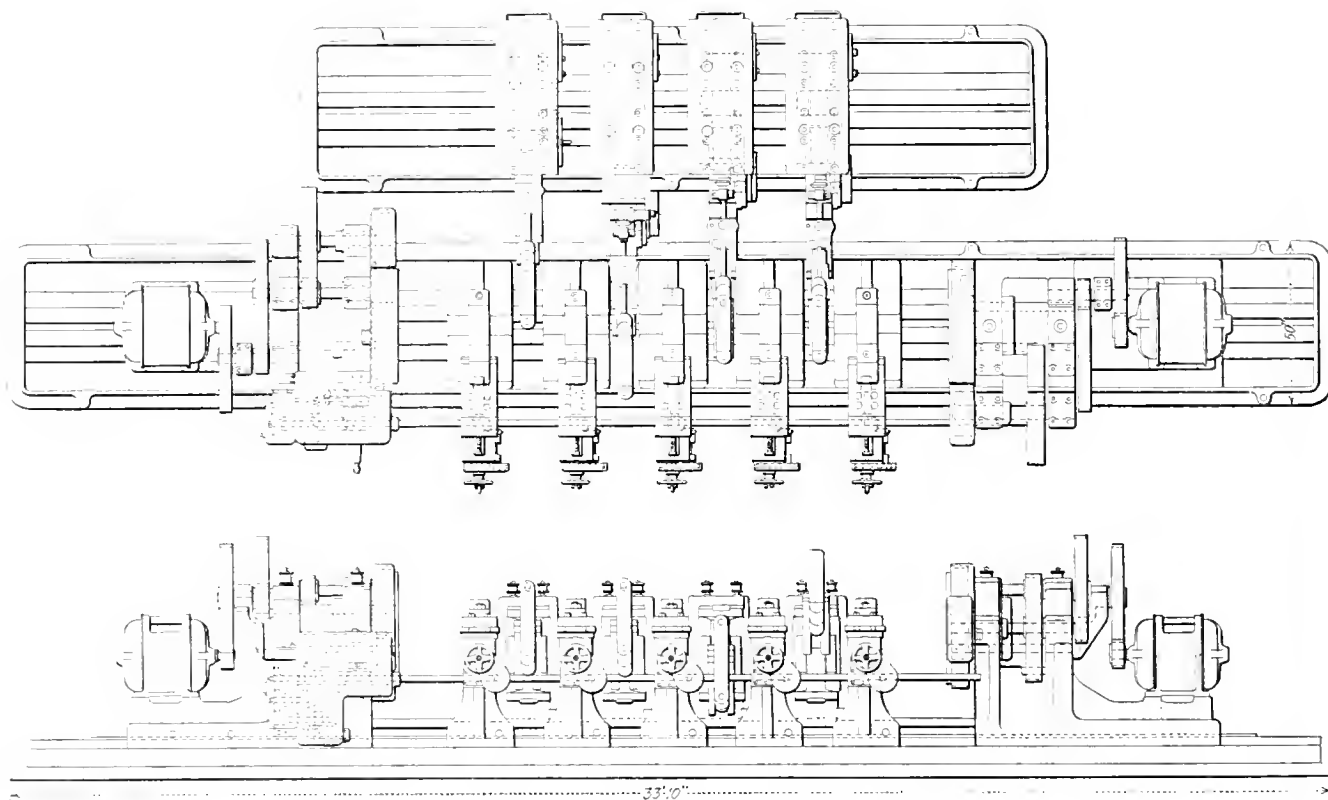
DETAILS OF CRANK-SHAFT LATHE
